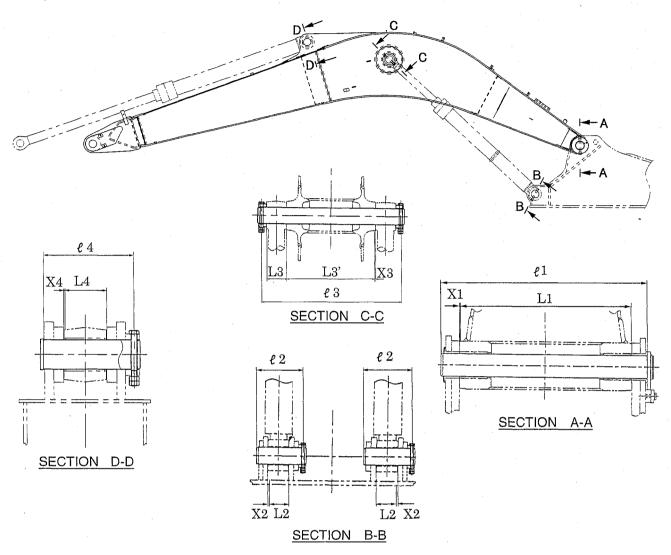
Clearance in thrust direction on the boom cylinder installation section
